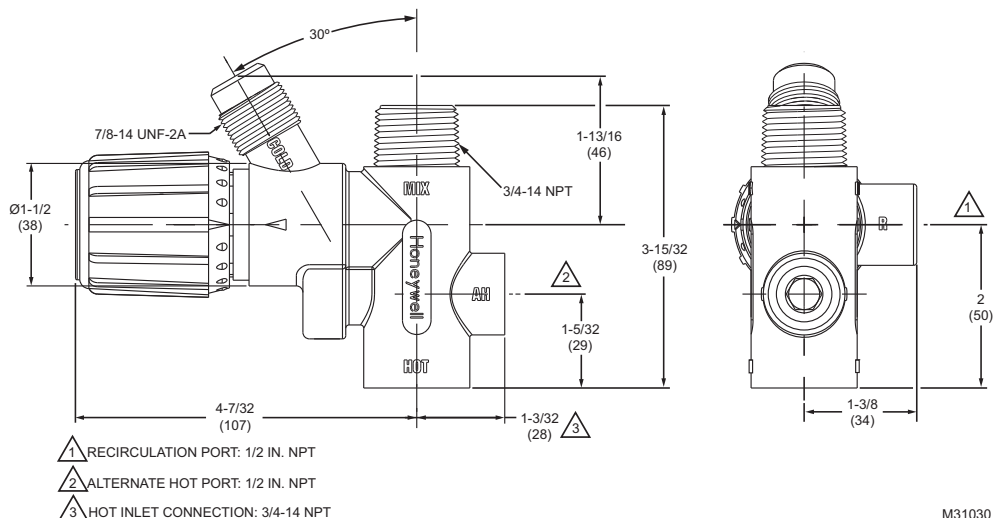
AMX300 Mixing Valve dimensions in in. (mm).
